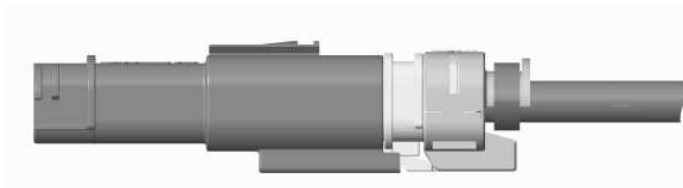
e: DT Highspeed Socket Assembly mated to Blind Cap (Universal Key)
